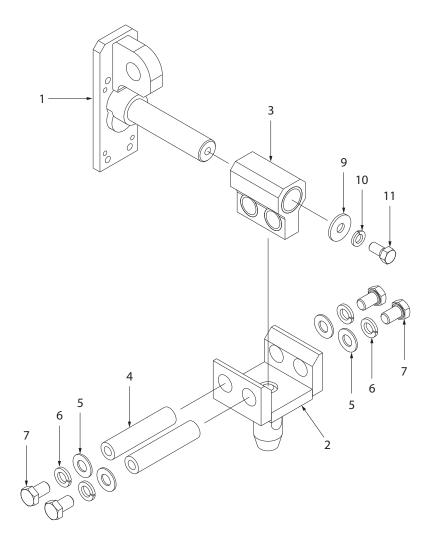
AGSE-E25950-S01 Fixed FWD Mount Assembly - LH
